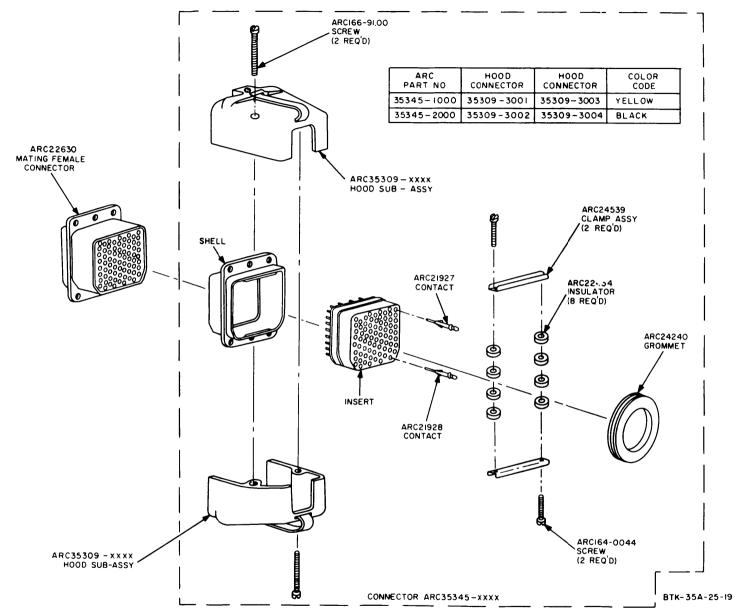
Connectors ARC 22630 and ARC 28148, exploded view.
